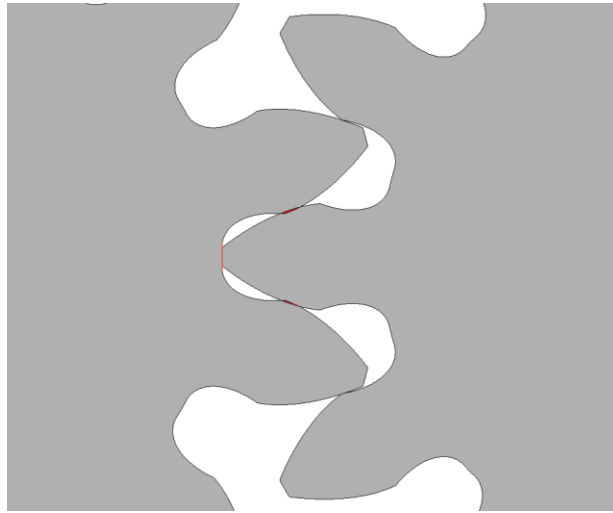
Gears with zero tip-to-root clearance thereby causing interference (highlighted in red) between the gears.
